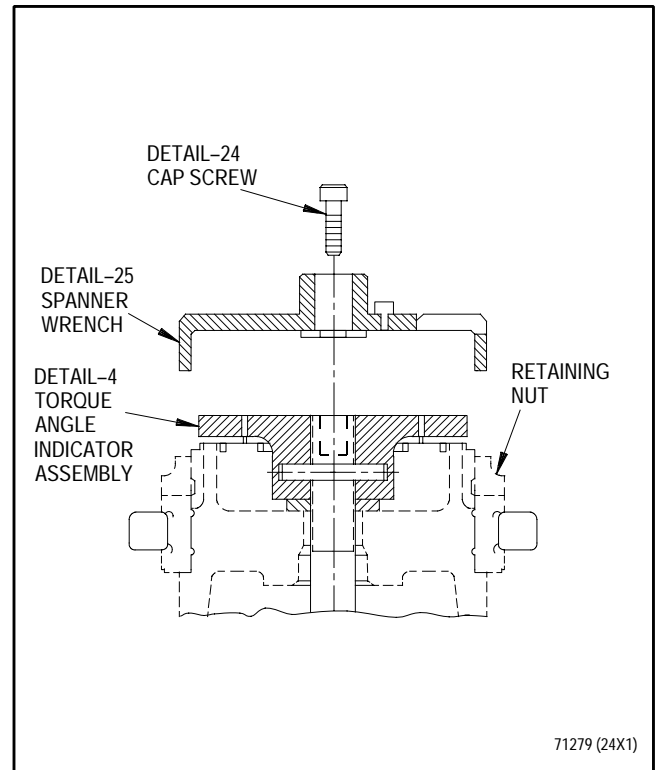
No. 5 Bearing Inner Support Assembly and No. 5 Bearing Inner Race and Rollers - Assembly (Sheet 3 of 6)
